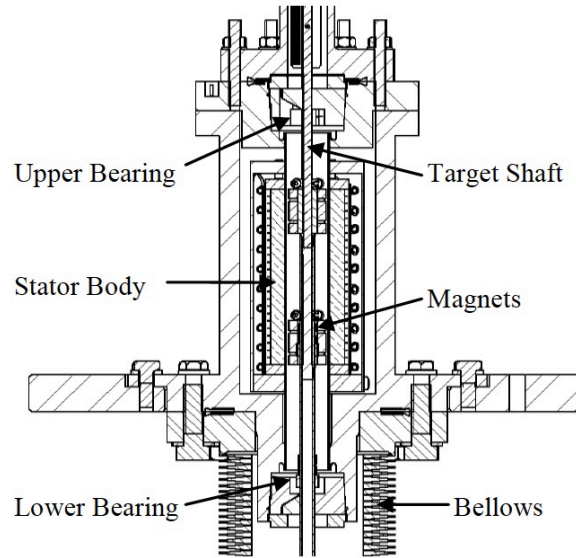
The target body showing the stator mounted within the flanges and supporting the top and bottom bearings. Figure taken from Ref. [67].
